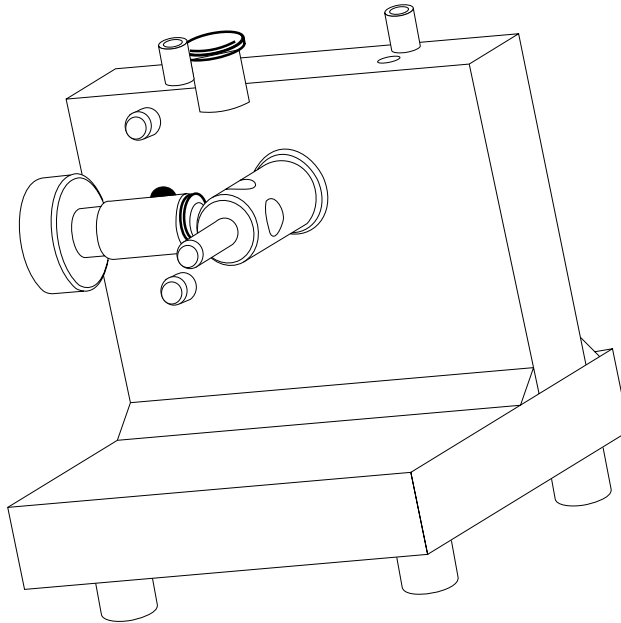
Jig bush location for the part shown in Fig. 15.48
